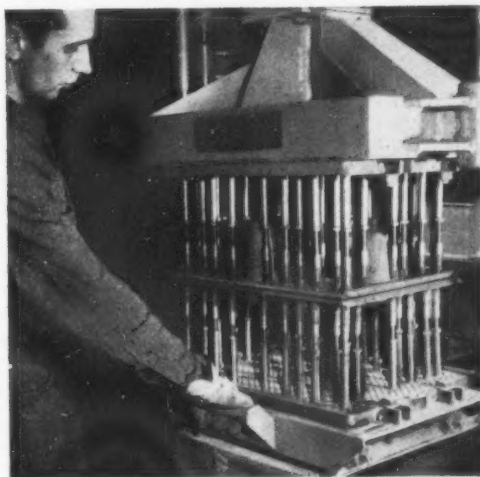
Cope and Drag Components of Shell Moulds are Bonded Together with Adhesive on this Automatic Machine
